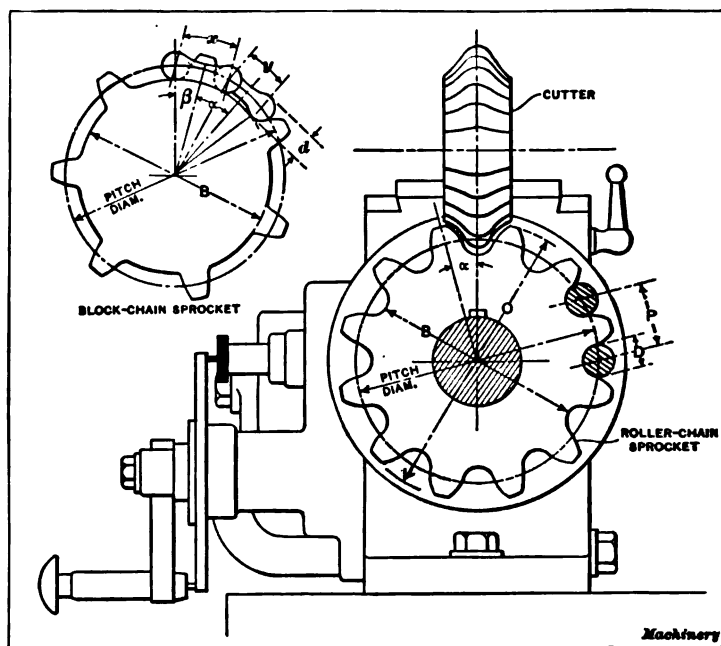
Cutting Sprocket Teeth in a Milling Machine
